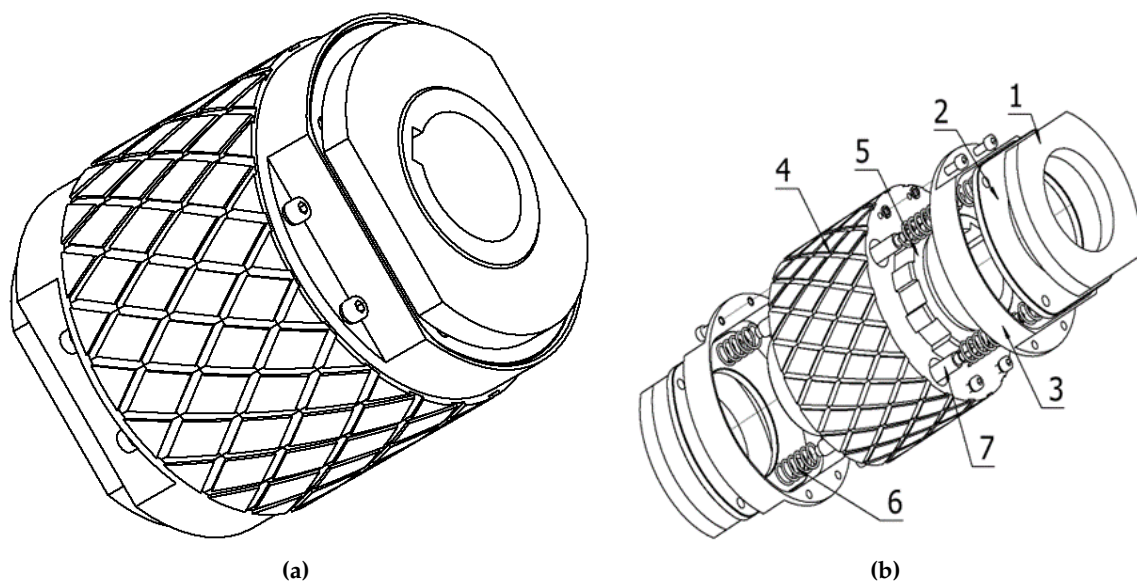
Schematic diagram of spinning roller structure.(a)fabrication.(b)exploded diagram.1-Threaded sleeve; 2.Limit sleeve; 3.Shroud; 4.Friction ring; 5.Roller shaft; 6.Floating spring; 7.Spring guide bar
